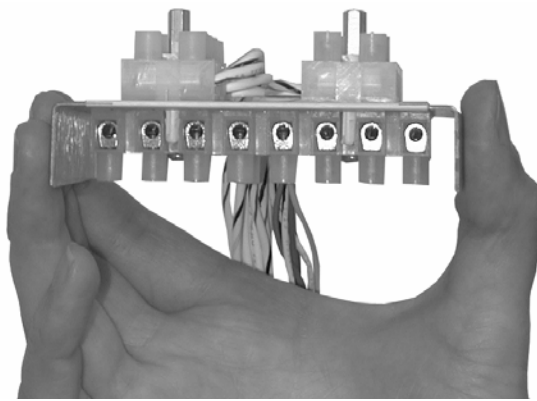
Sierra I Wiring/Removable Terminal Blocks
